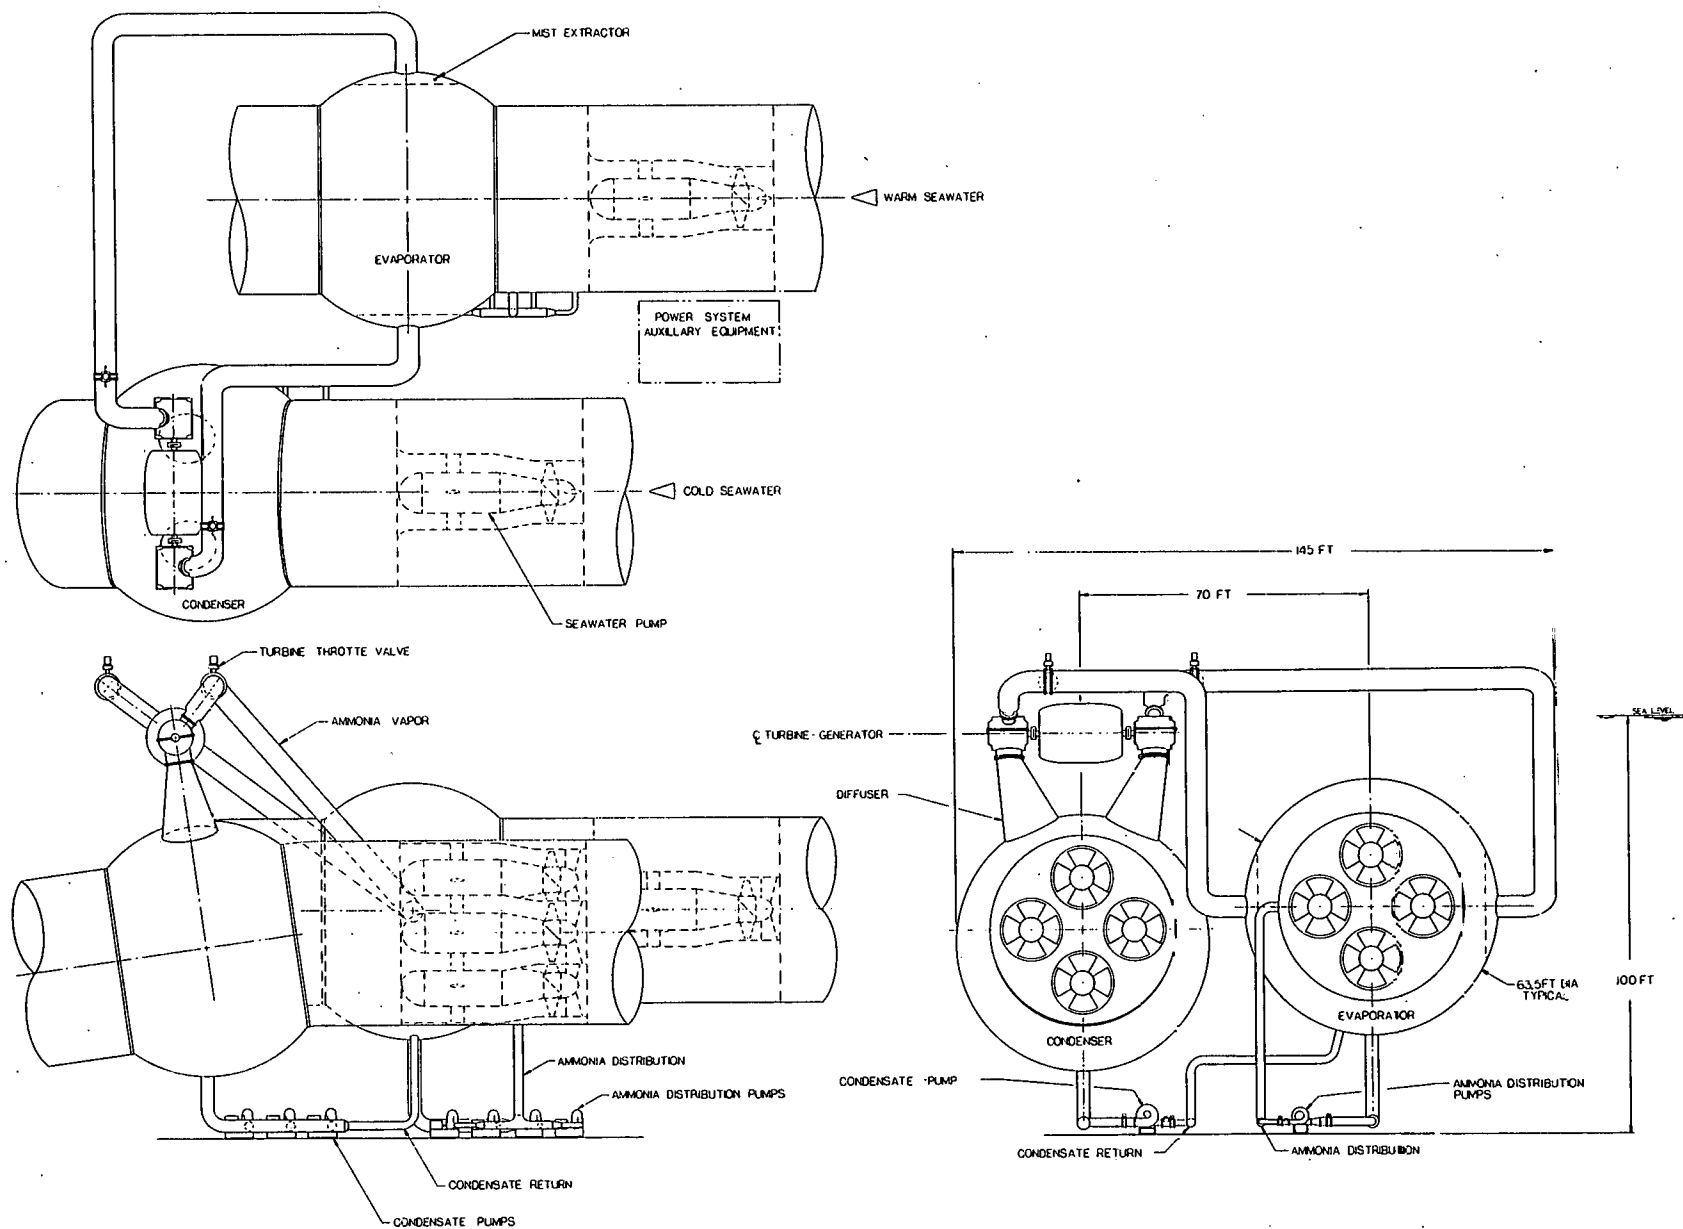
25-MW(e) Surface Platform General Arrangement
